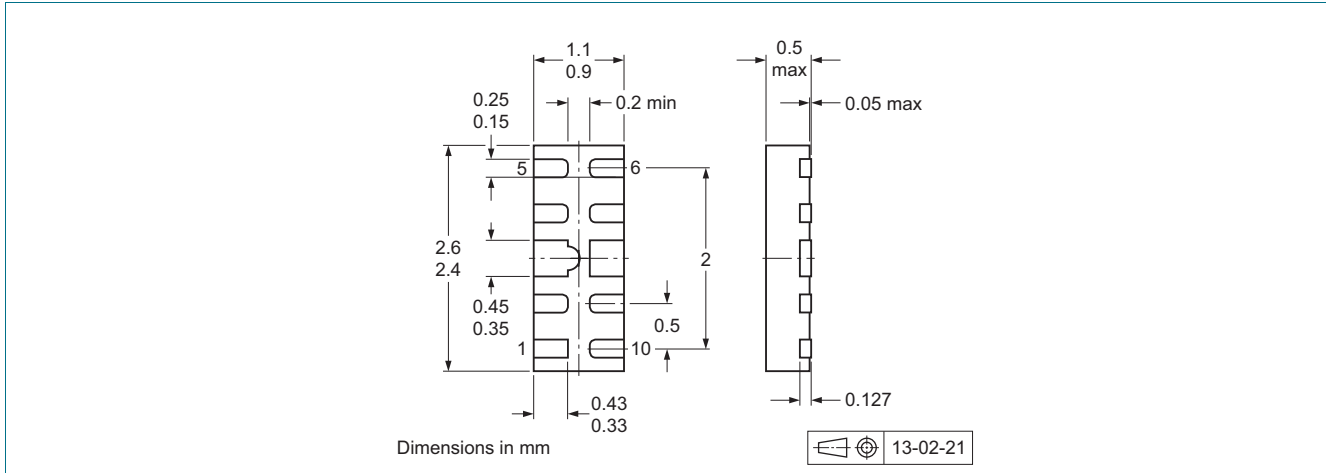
Package outline DFN2510-10 (SOT1165-1)
